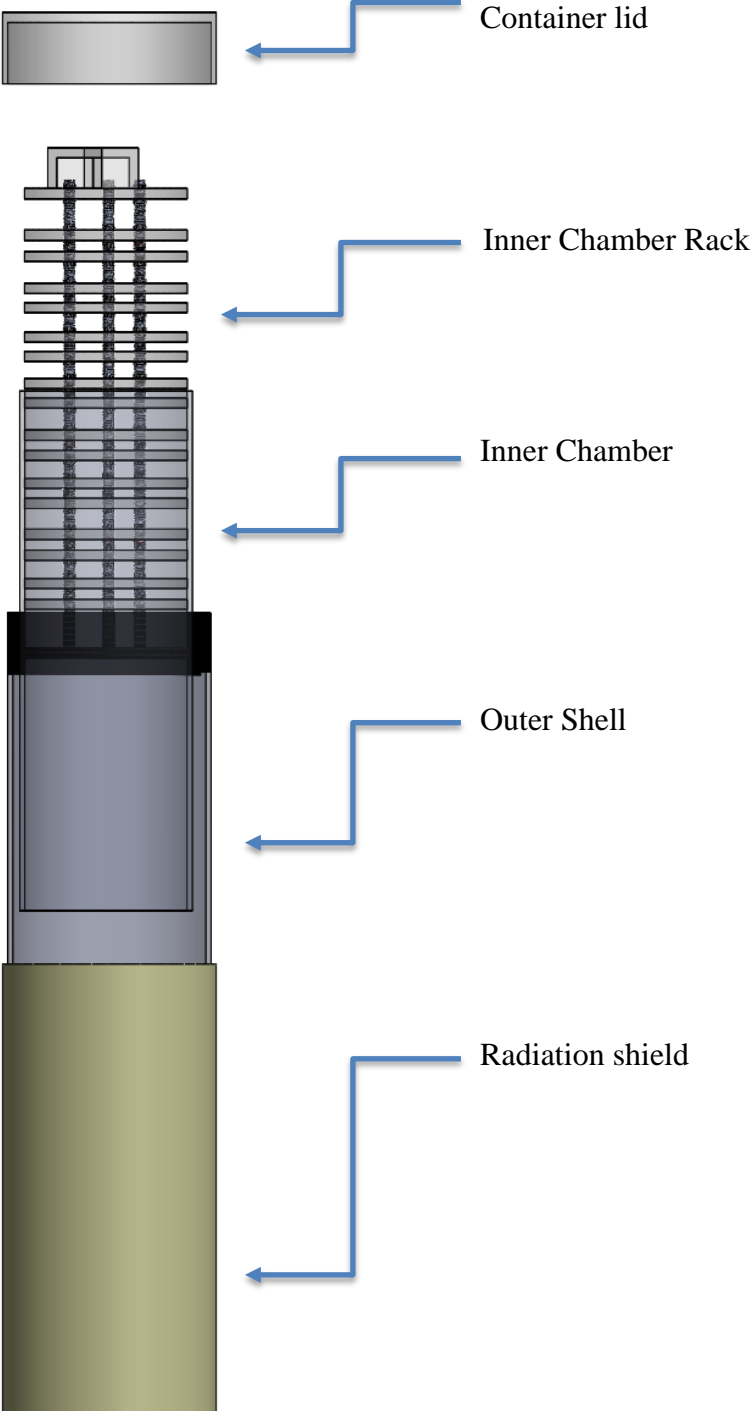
shows an exploded view of the complete container with all major parts labeled.
